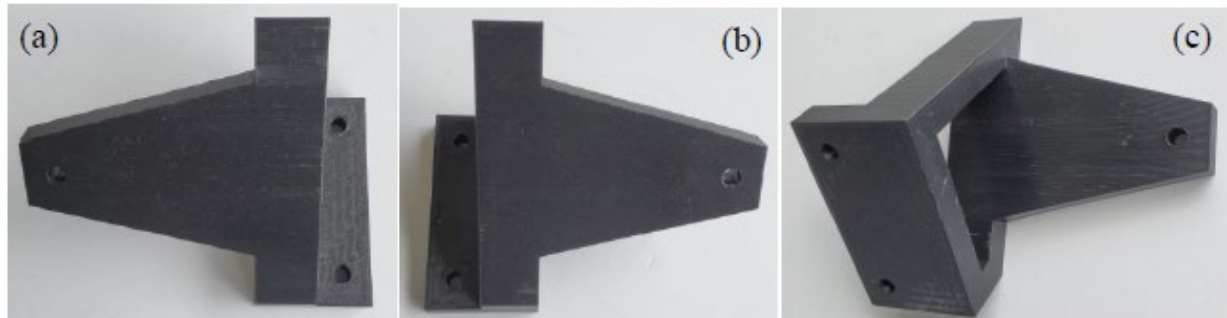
3D printed solar brackets: (a) front view of the solar bracket left, (b) front view of the solar bracket right, and (c) downside view of (a).
